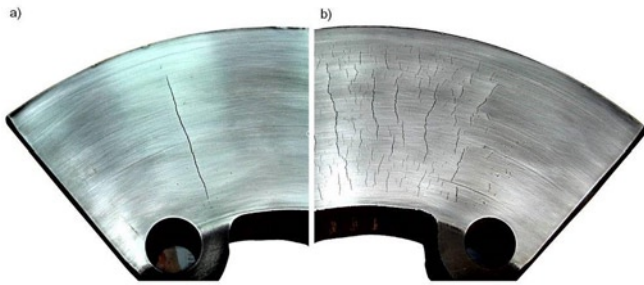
View of friction disc brake discs after several years of use: a) with one crack, b) with surface cracks
